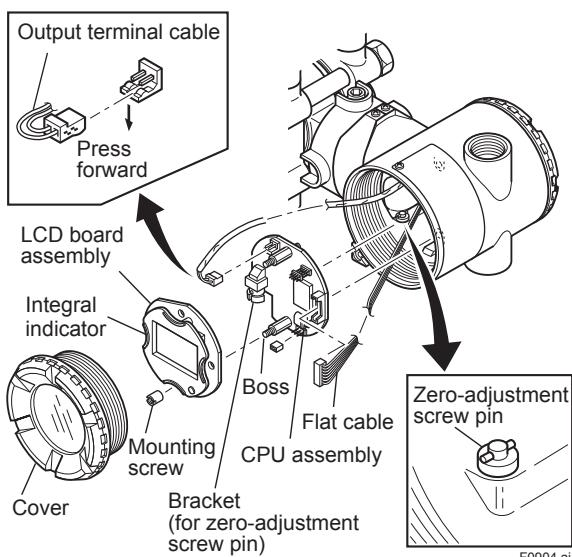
Removing and Attaching LCD Board Assembly and CPU Assembly
